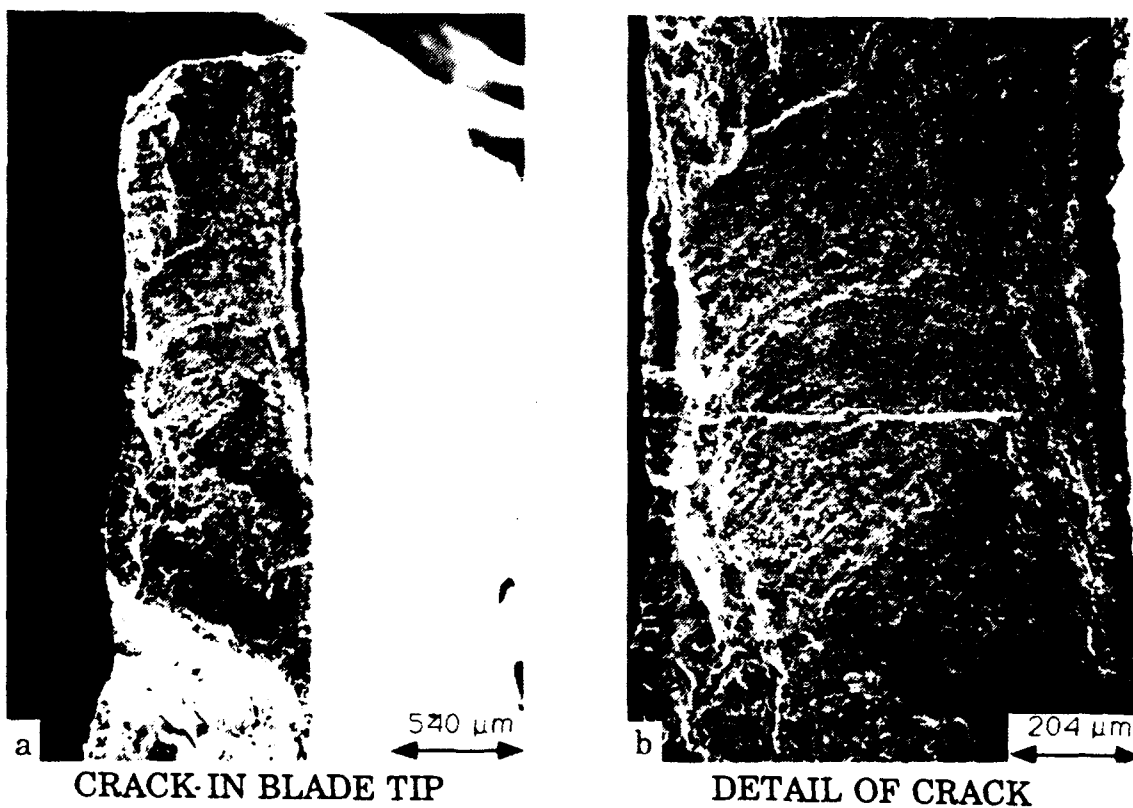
Fractographs of a crack in a DS-R80H HPT blade, ASMET engine tested, MERL 72 tip repaired by Chromalloy with concave side tip film cooling holes before engine test.
